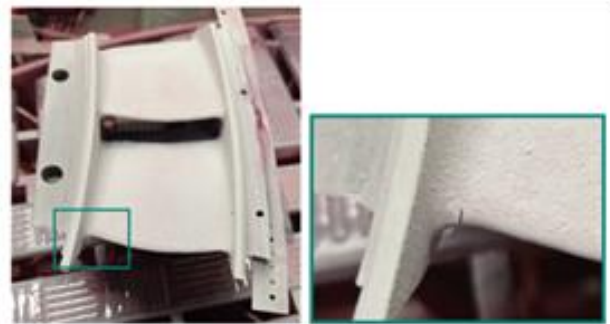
Additively manufactured nozzle liquid penetrant inspection and detailed view on the notch
